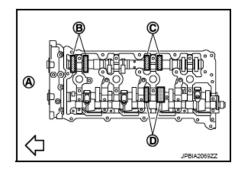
Identifying Valve Clearances Measuring Areas Of No. 5 Cylinder Courtesy of NISSAN MOTOR CO., U.S.A.
